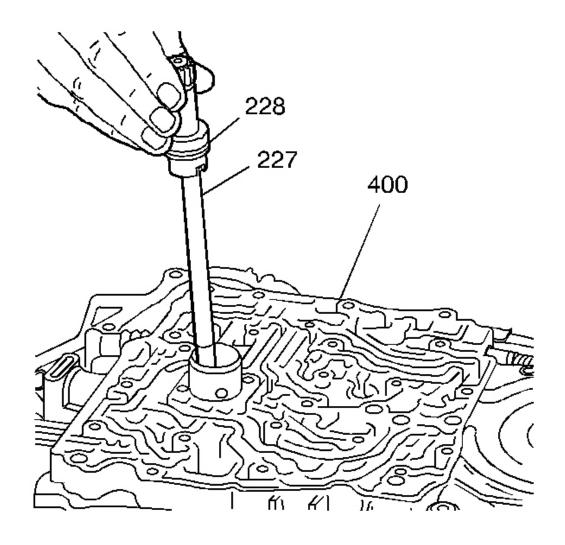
Installing Oil Pump Drive Shaft Assembly Courtesy of GENERAL MOTORS CORP.
